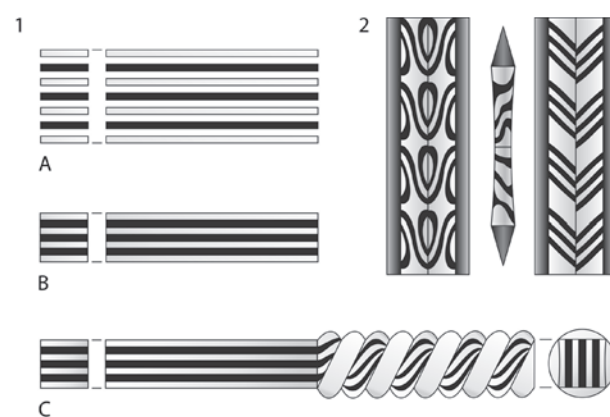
Consecutive steps of forging a pattern-welded blade. Drawing by P. Kucypera.
